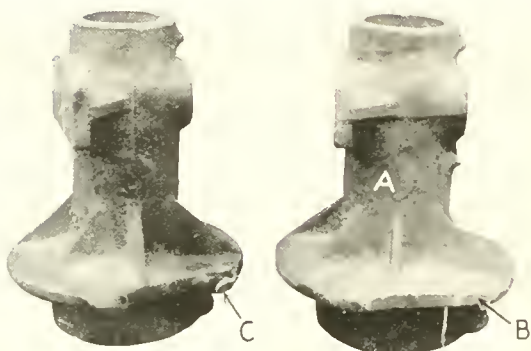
Malleable Iron Brake Spider in which part of the flange at "C" was missing. This was readily filled out by welding, where mechanical repair would not have been practical.
